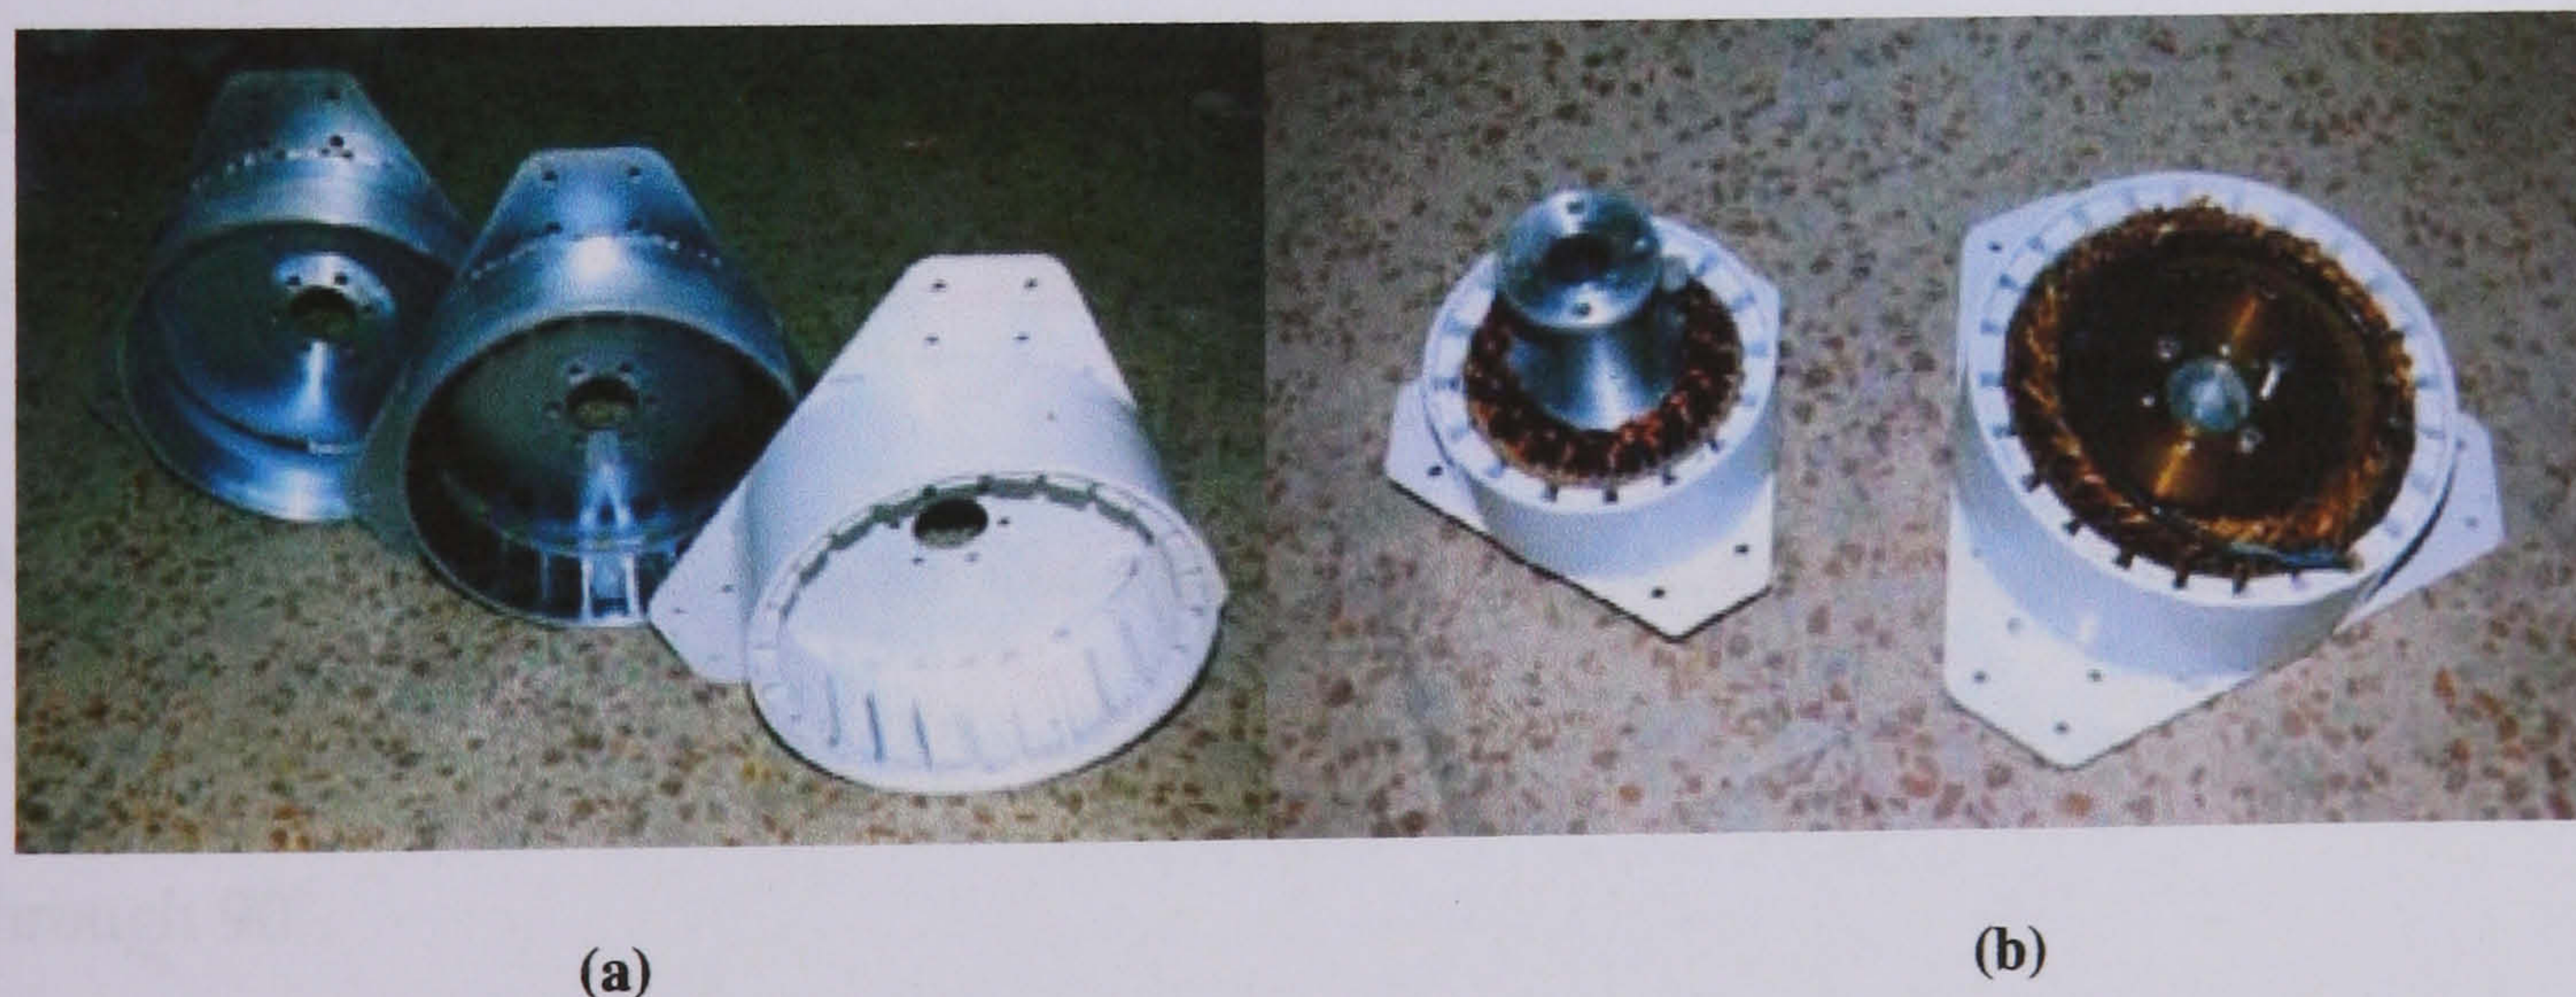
Conventional radial-flux machine showing (a) the 'magnet can' and (b) the rotor with the stator [31]
